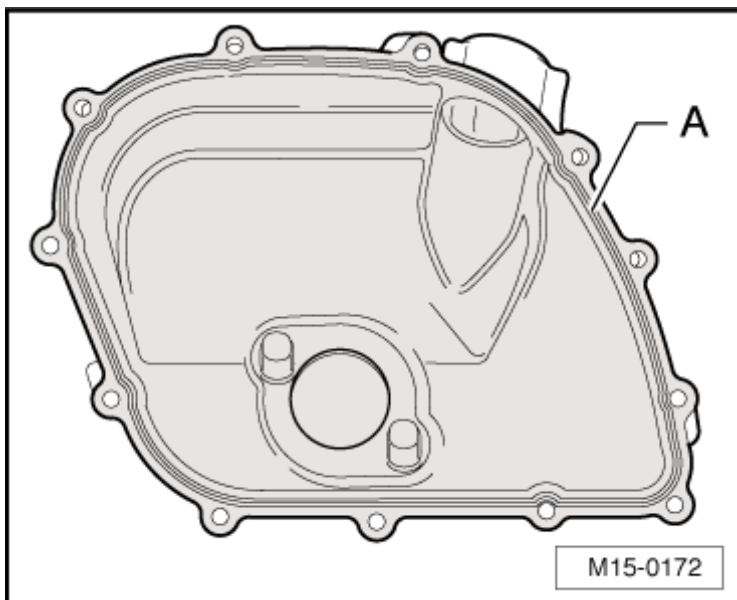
Identifying Sealant Bead Applied As Depicted To Clean Sealing Surface Of Chain Case Cover
